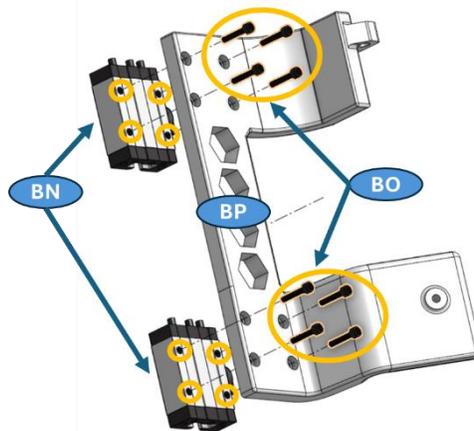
Carriage Rail Strut Assembly. Right XL Strut shown as example.
